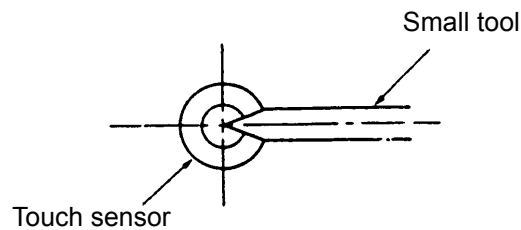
Manual Alignment of Small Tool Center with Touch Sensor Center
